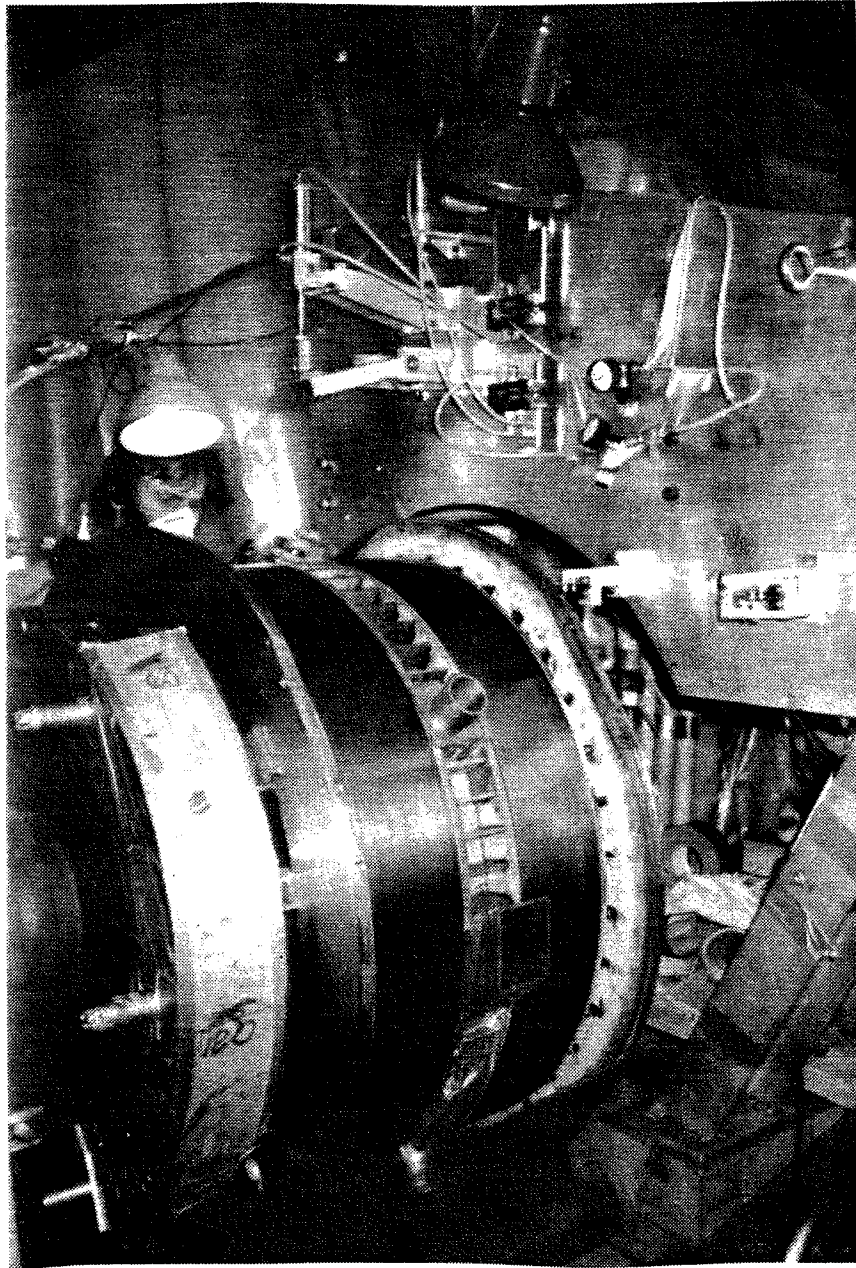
Photograph of the main coil on the winding machine. The median plane bridge structure shows between the two coil halves.
